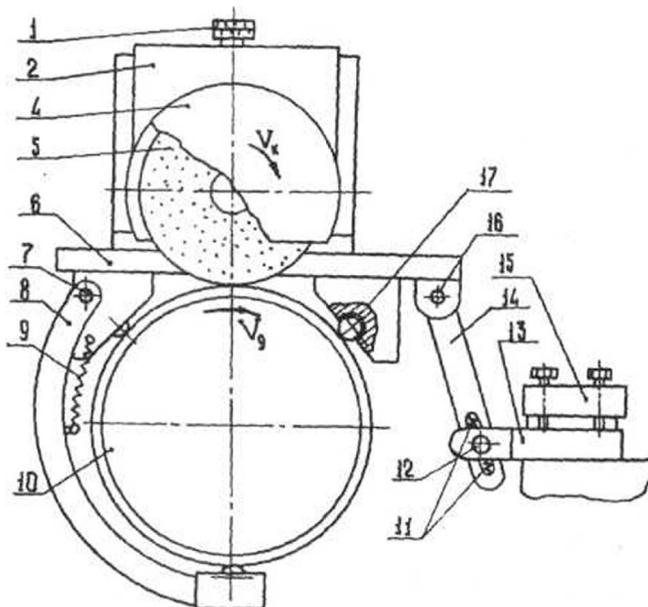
Machining device for grinding of hydraulic cylinders parts of large size
